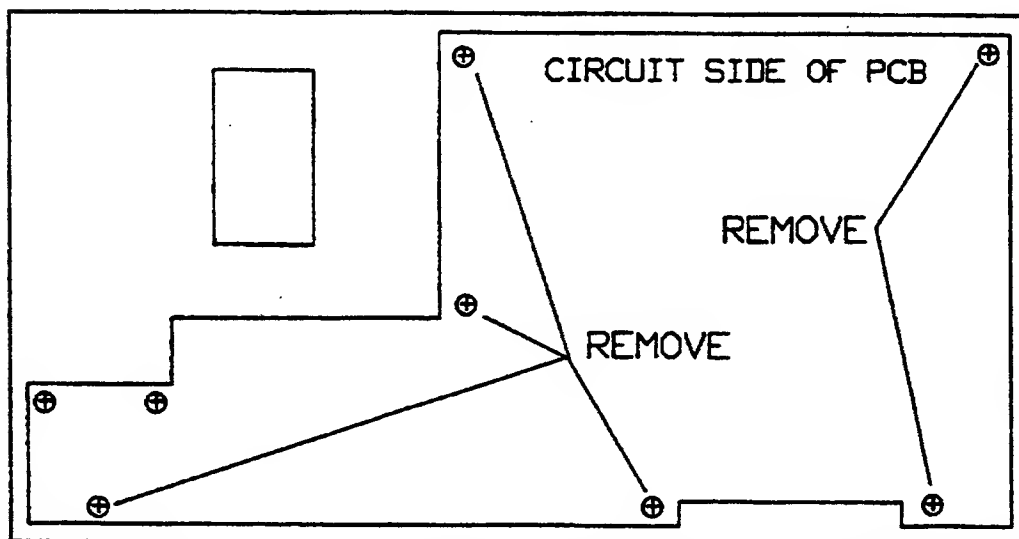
Pertec-compatible Interface PCA Mounting Screws.
